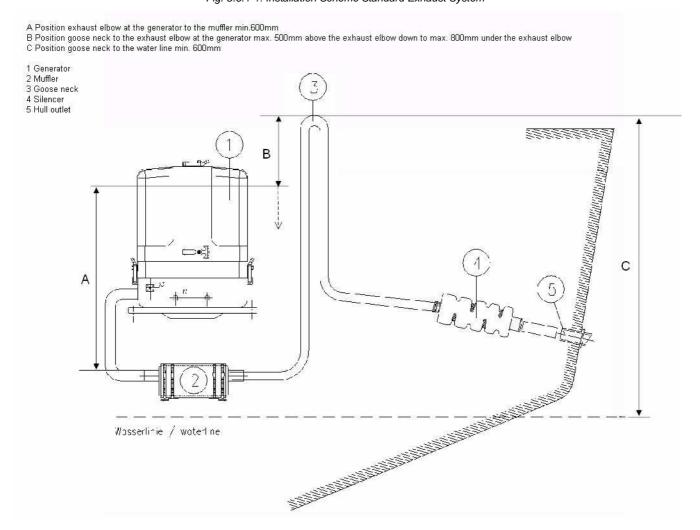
Installation Scheme Standard Exhaust System
